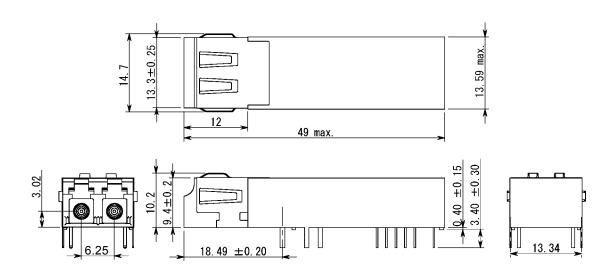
Outline Dimensions (SCM6202-GL-C#)
